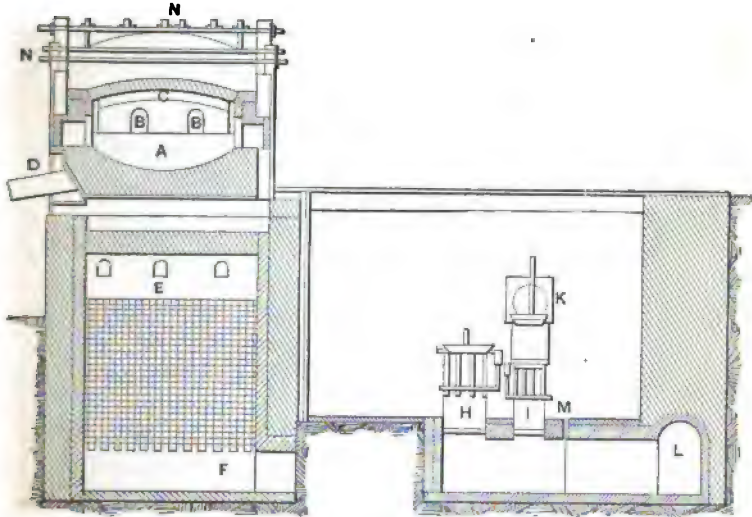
Longitudinal Section of a Typical Open-hearth Regenerative Gas-furnace.
